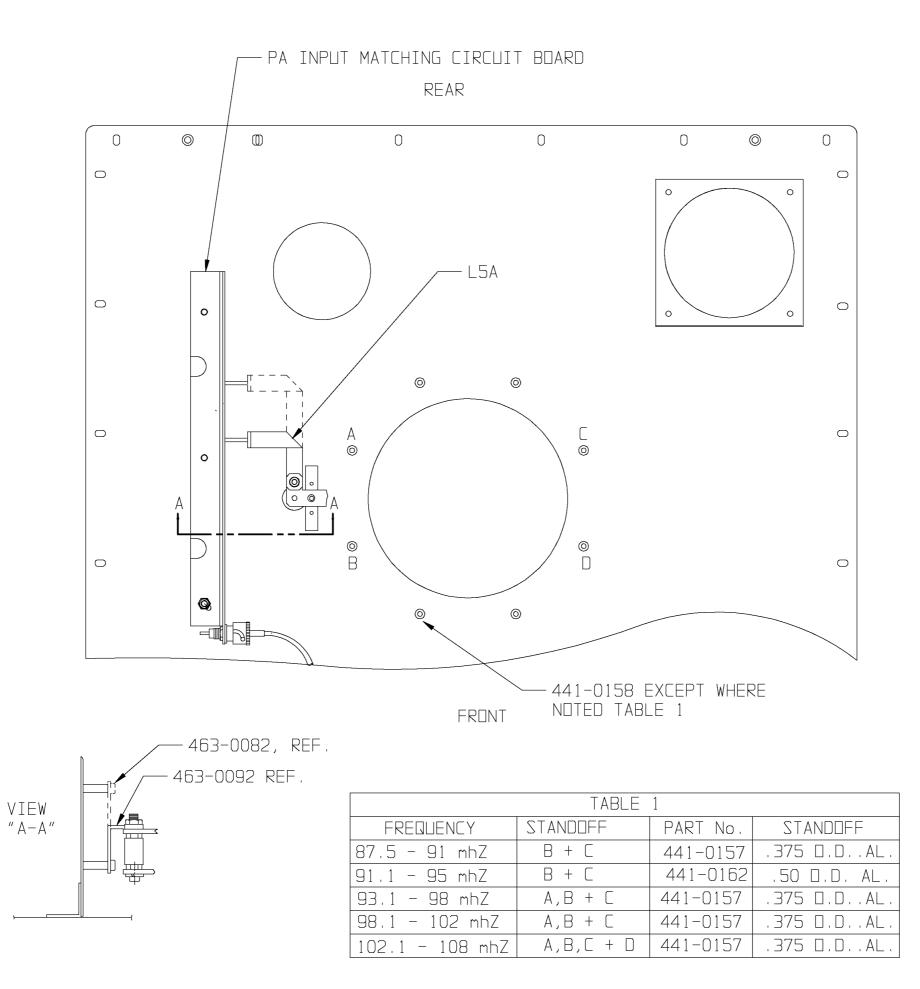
FM-20T TUBE SOCKET ASSEMBLY (SHEET 3 OF 3)
